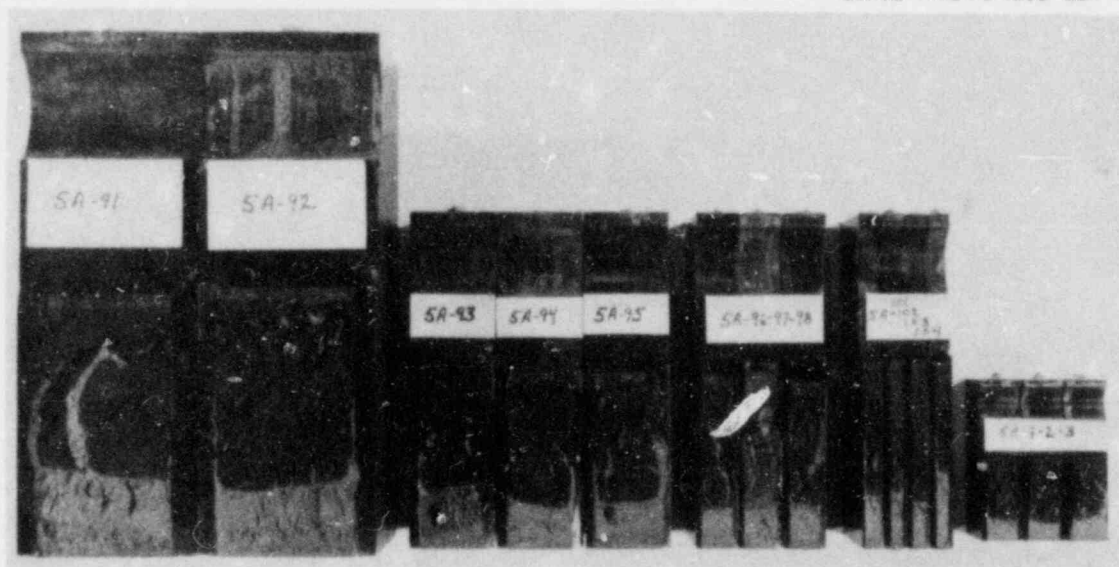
Fracture surfaces of crack-arrest specimens of TSE-5A steel tested at 0°C.
